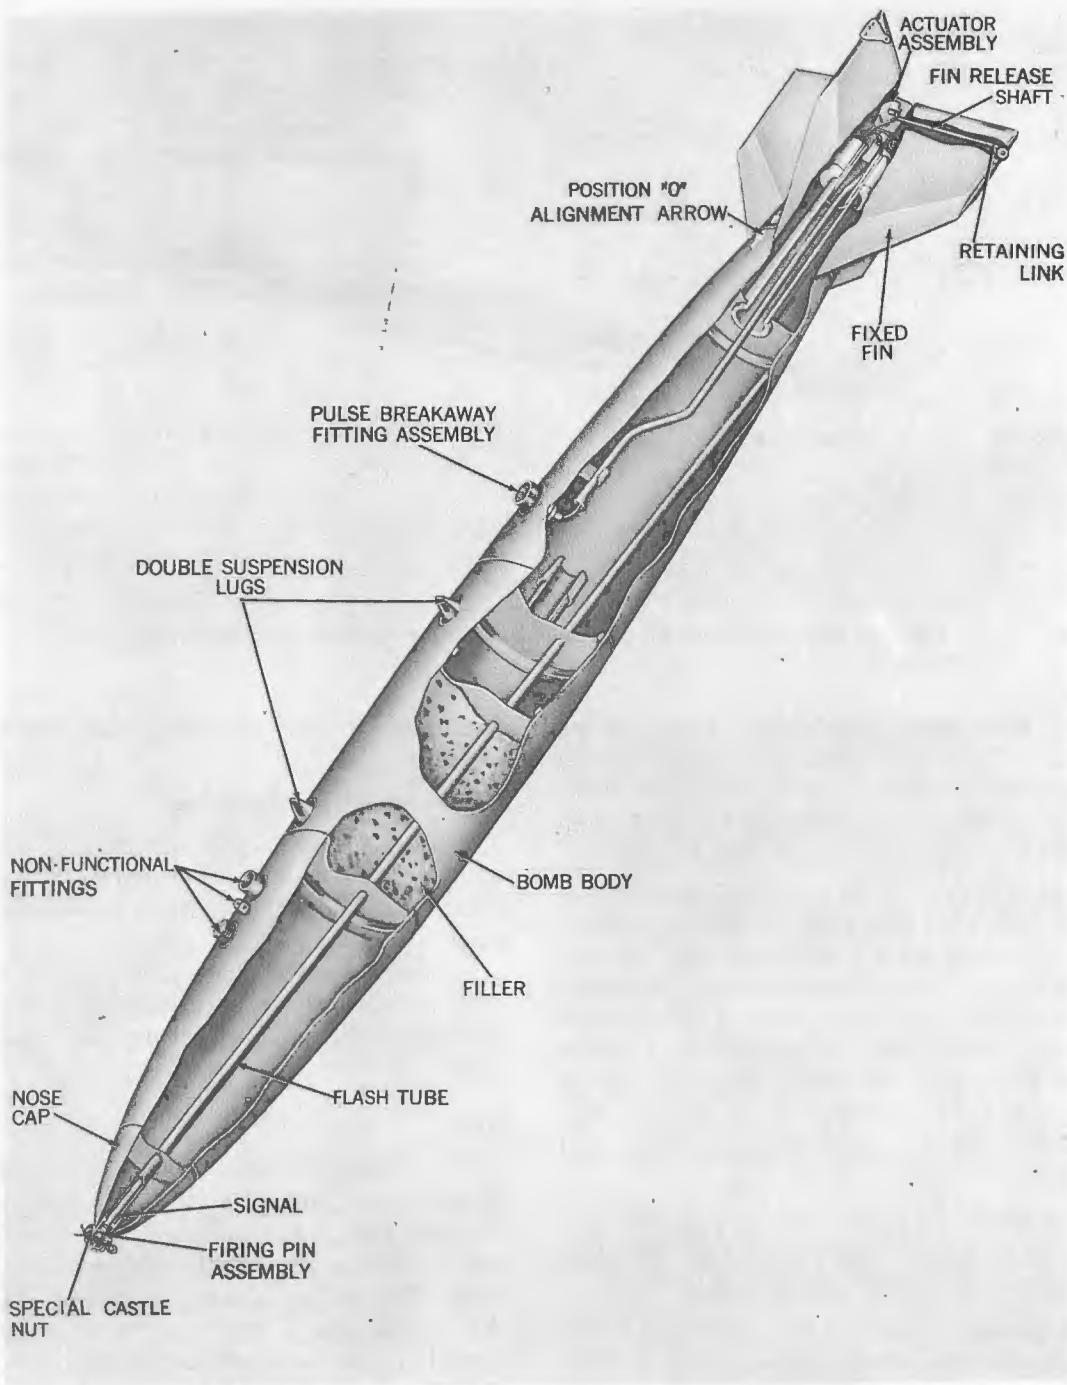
2000-lb Practice Bomb Mk 104 Mod 0, Cutaway View.
